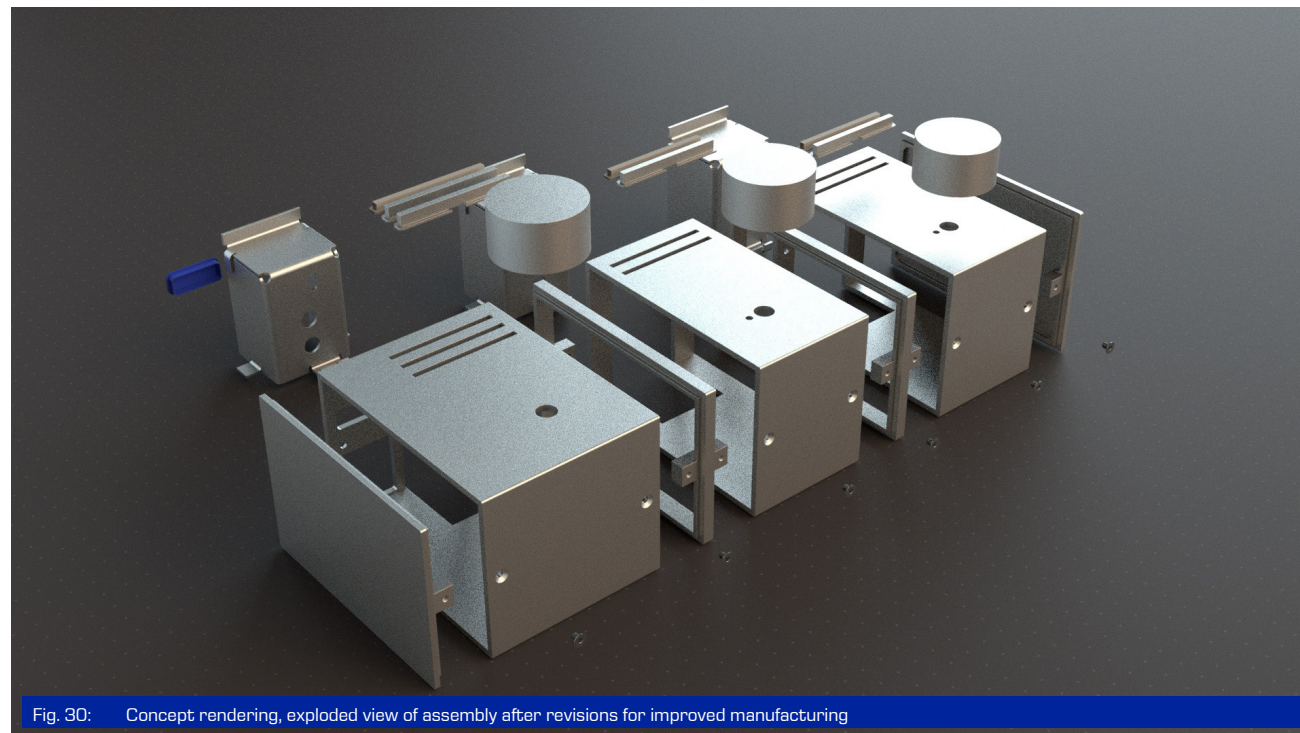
Concept rendering, exploded view of assembly after revisions for improved manufacturing
